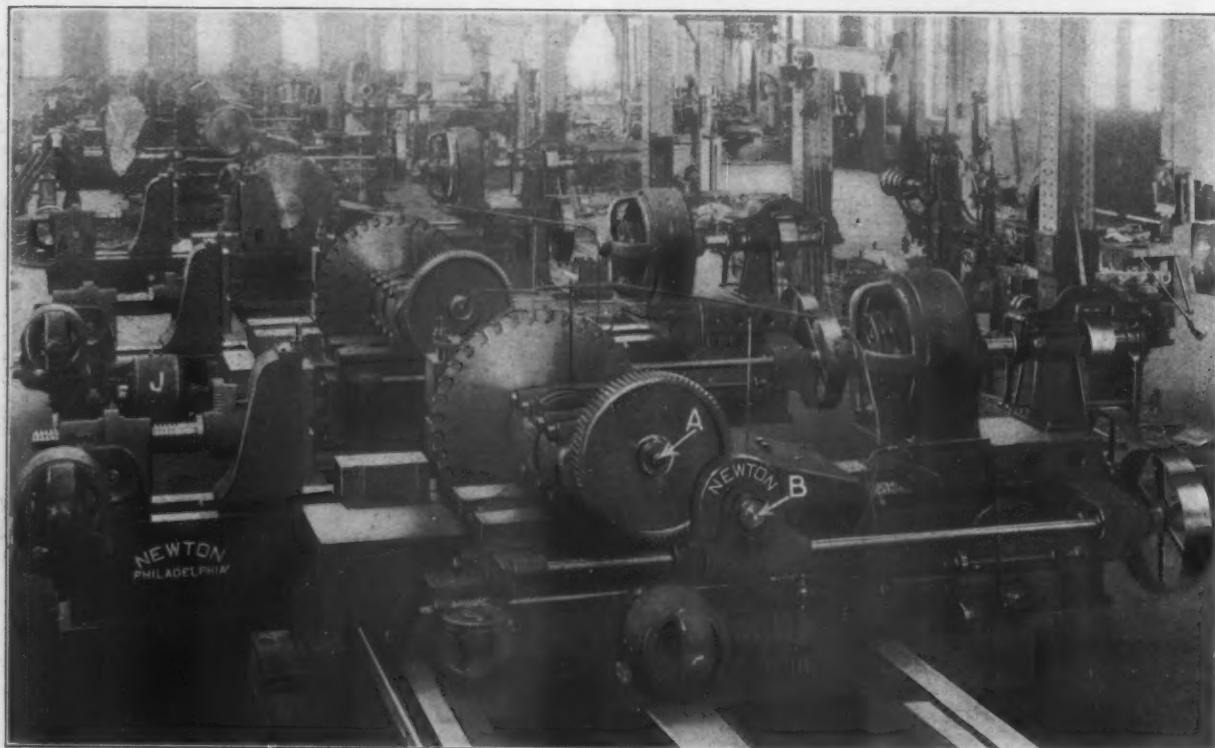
An Installation of Cold Saw Cutting-off Machines, Consisting of Two Units of Three Machines Each, Furnished the Bethlehem Steel Company by the Newton Machine Tool Works.
